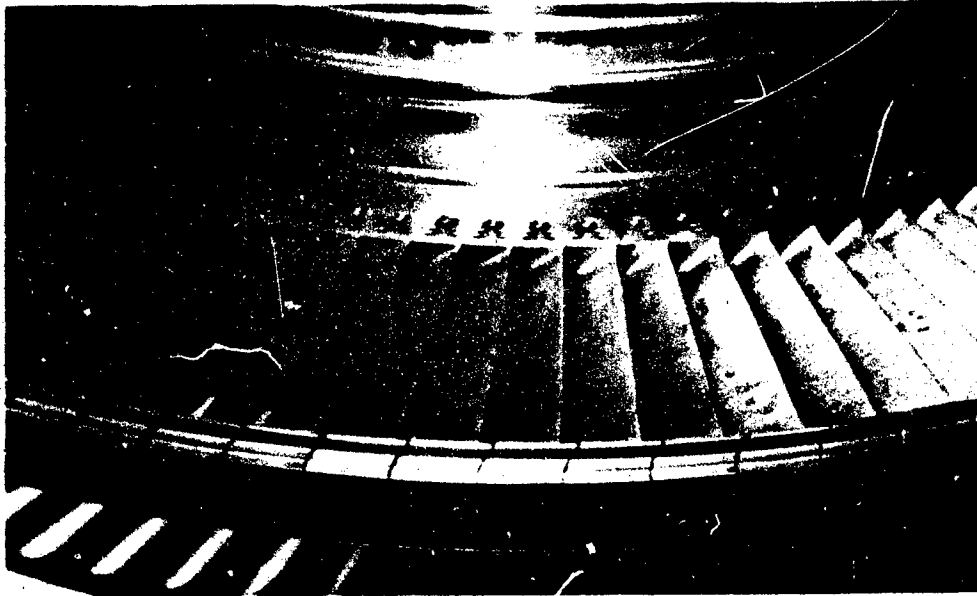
Build IV, First Rotor, Leading Edge Showing Cut-Back Inside Diameter Platforms and Tripwires (XPN-23417)
